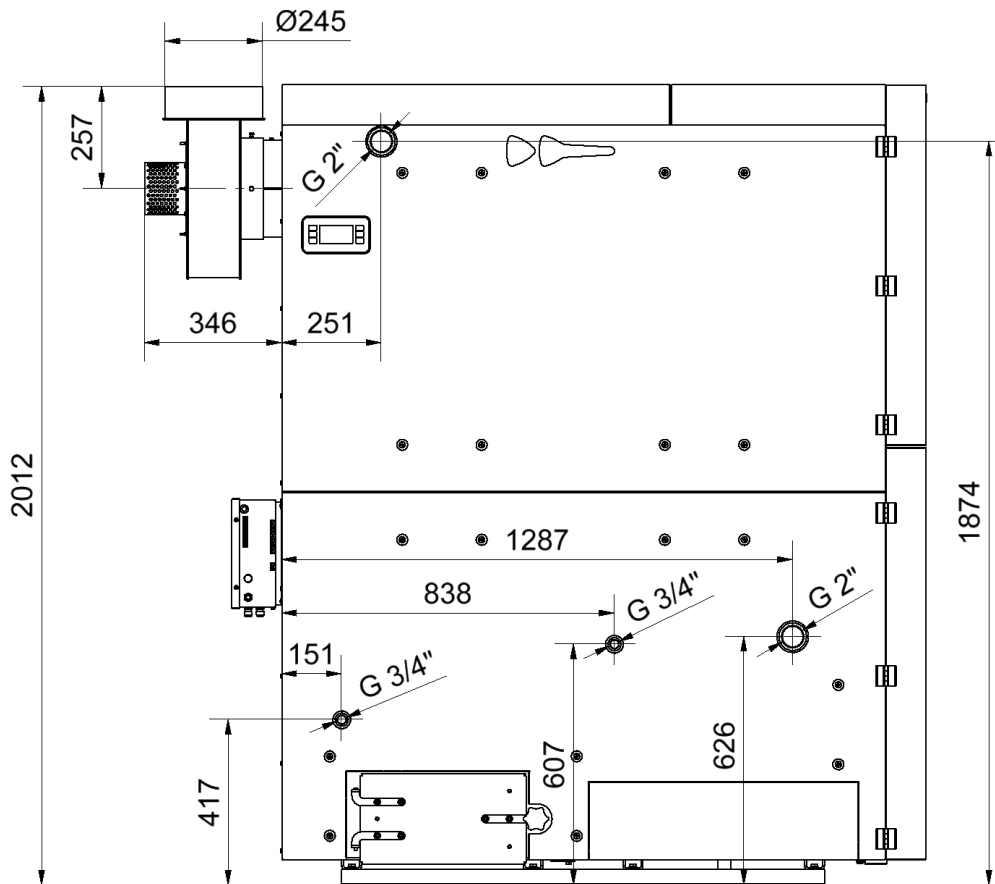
Connection dimensions of BENEKOV S100 boiler
